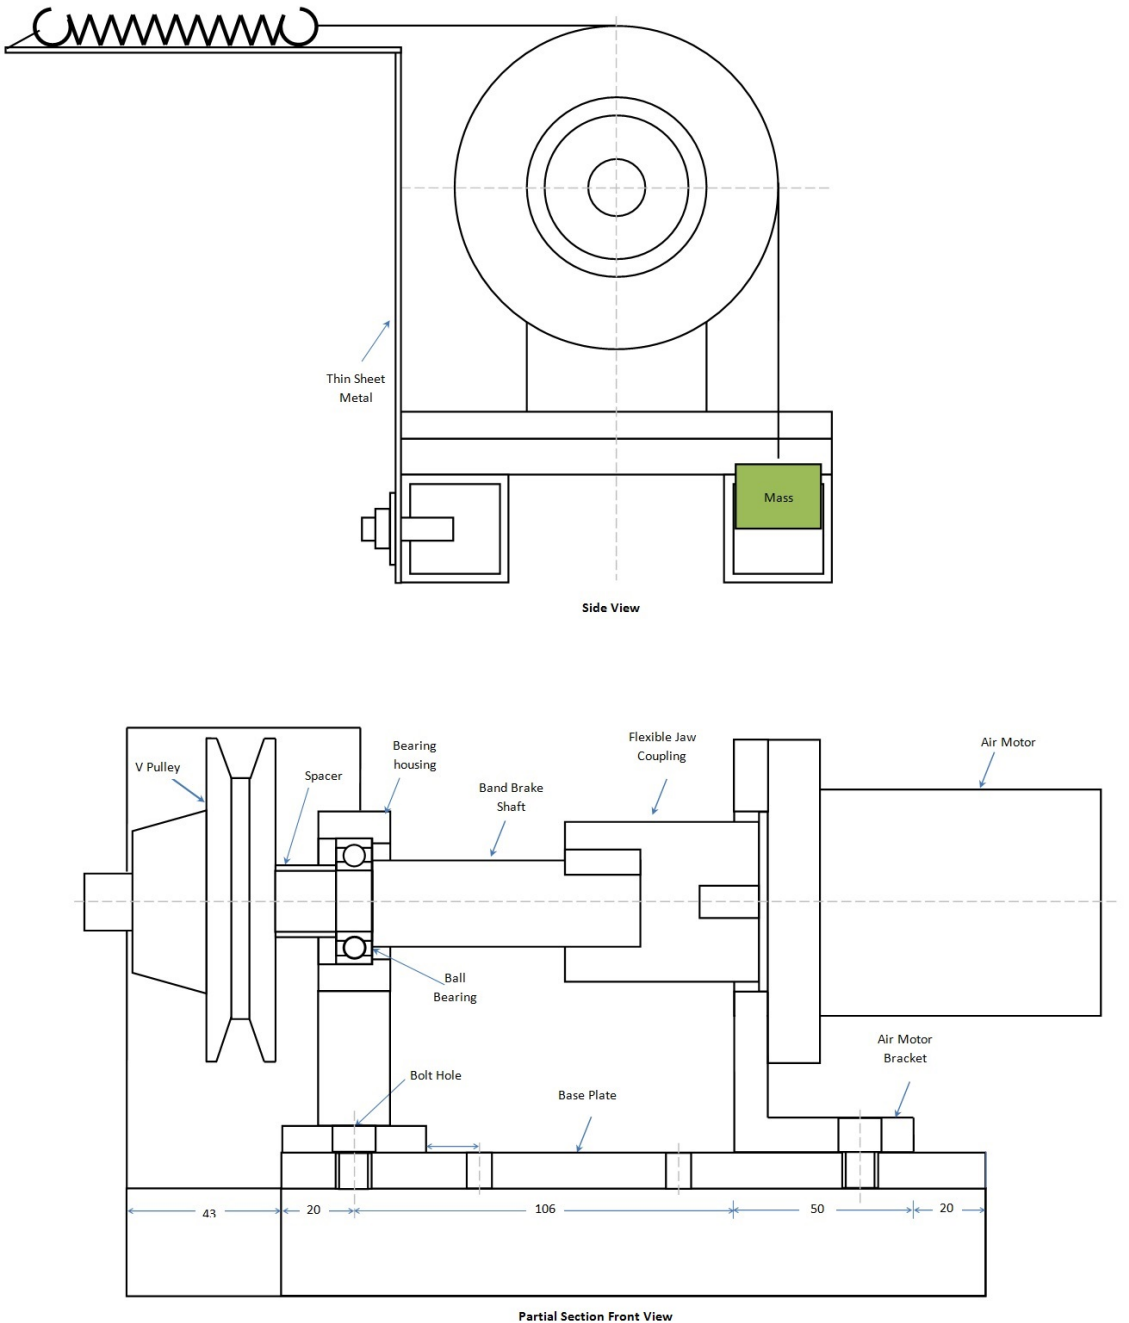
Air Motor Rig Assembly (initial design drawing)
